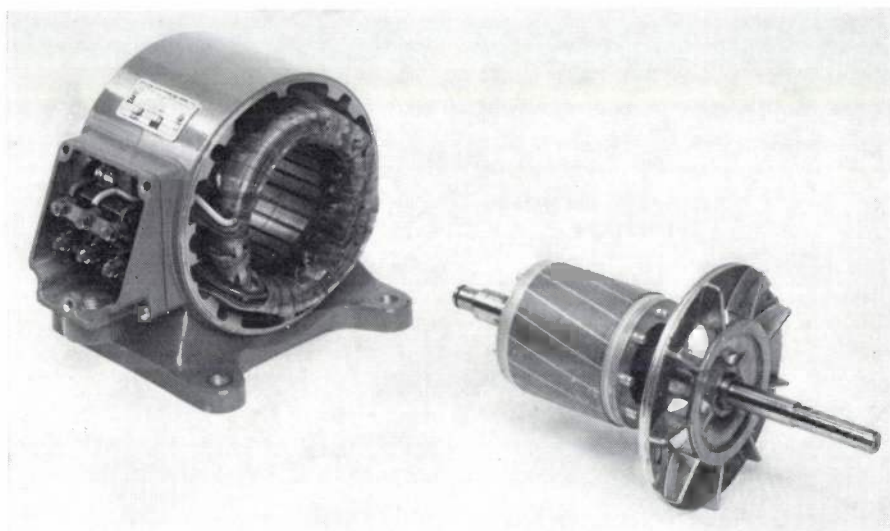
Stator and rotor of a 50 watt induction motor. The rotor is a squirrel-cage rotor; bars and end rings are cast as a single piece of aluminium (together with the fan wheel, which provides internal air cooling).
